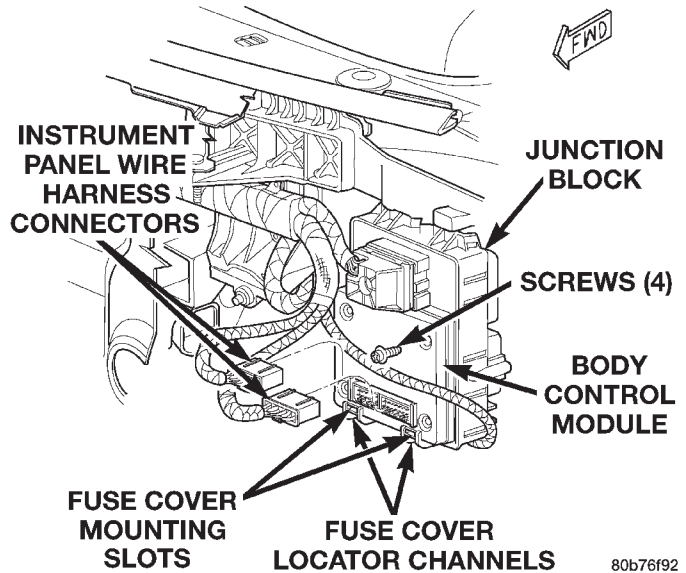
Instrument Panel Fuse Cover Locator Channels
